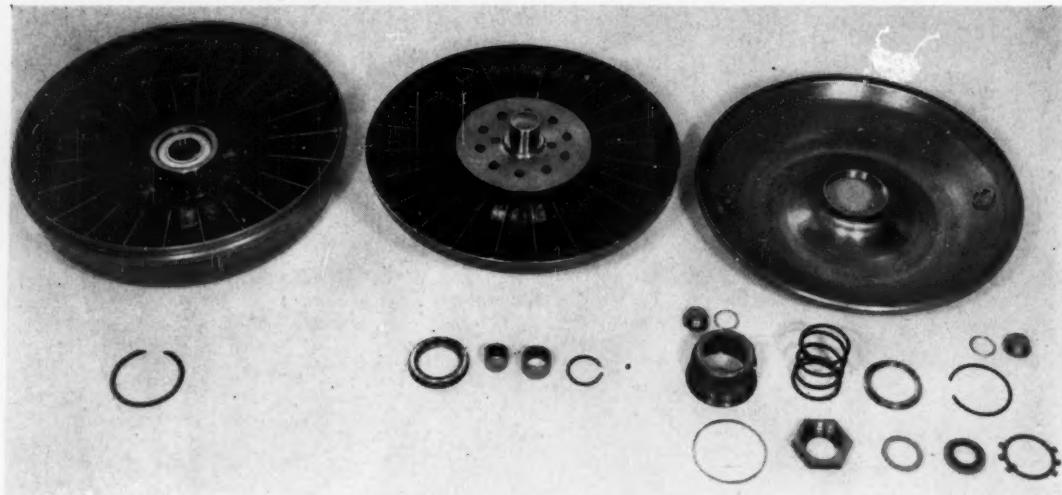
Fluid flywheel disassembled, showing various component parts. Twenty-two impeller blades are each held to the casing by three spot welds, a similar construction securing the 24 runner blades to the runner casing
